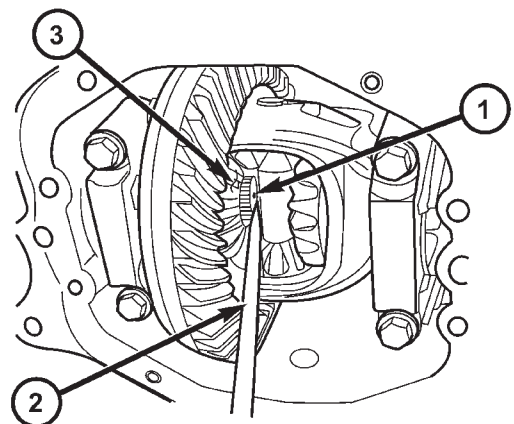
RIGHT SHAFT IN SIDE GEAR
